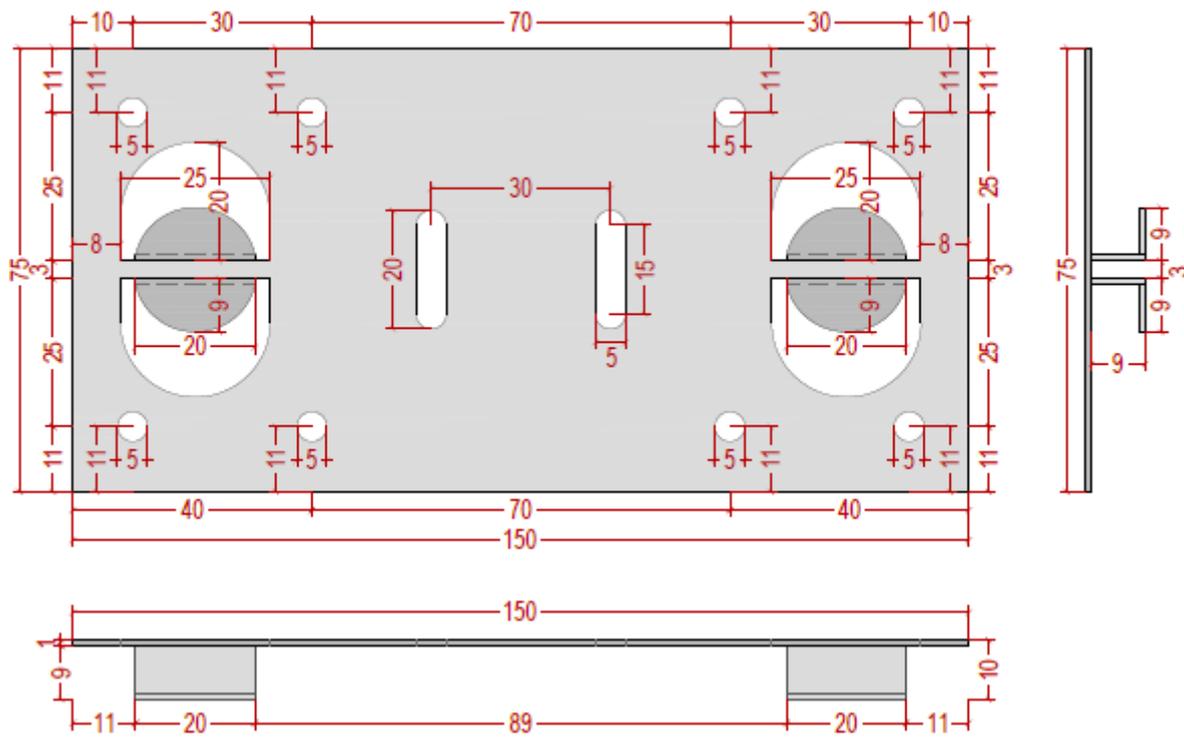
Technical drawing of the skin element fixing CRM.04
